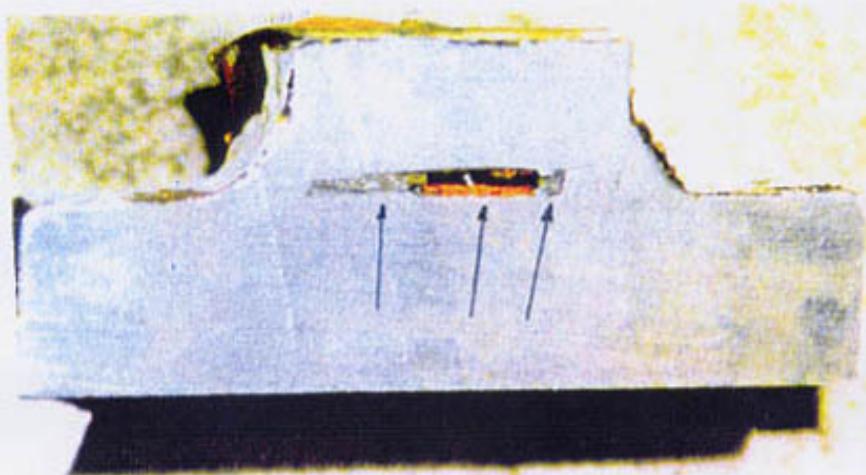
b: Corrosion products between lug plate and bushing
